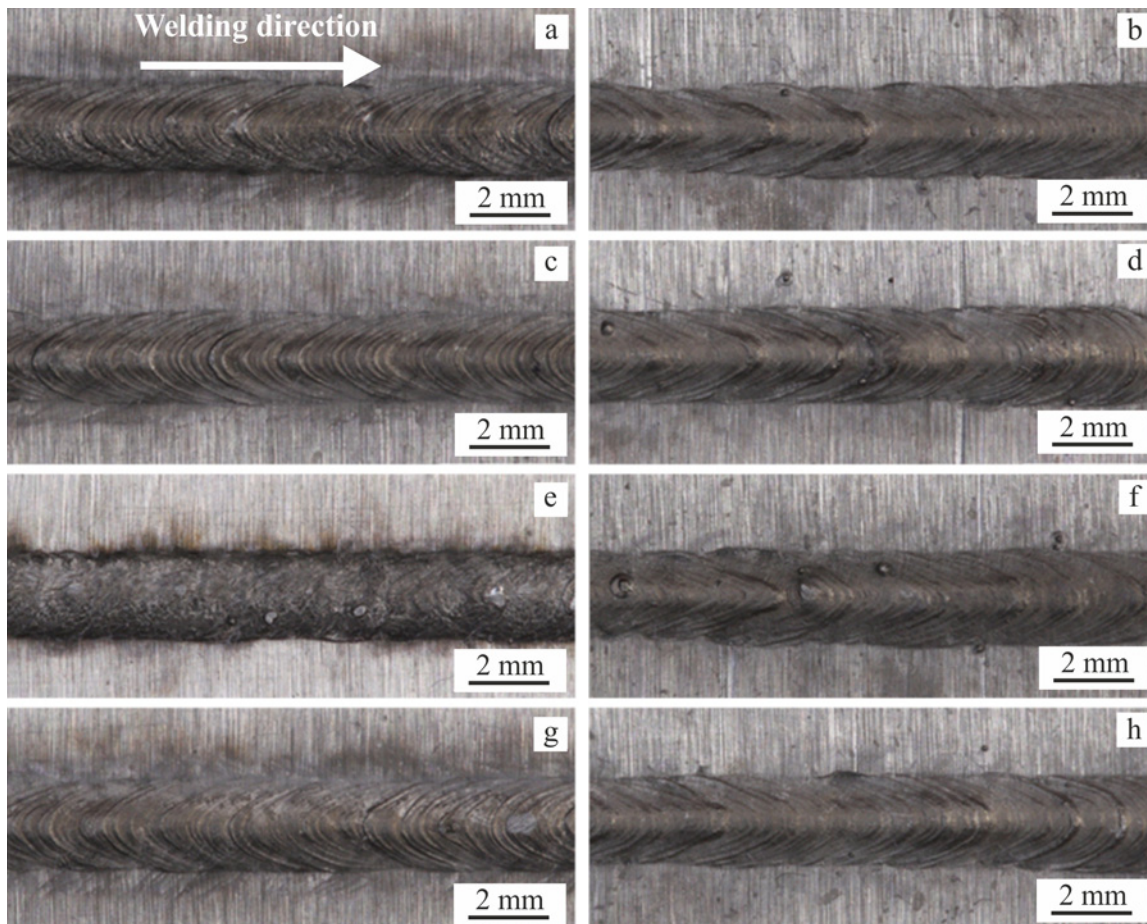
Weld beads and roots of weld joints: (a), (b) Ar 4.6; (c), (d) Aluline He5; (e), (f) He 4.6; (g), (h) Aluline He30.
